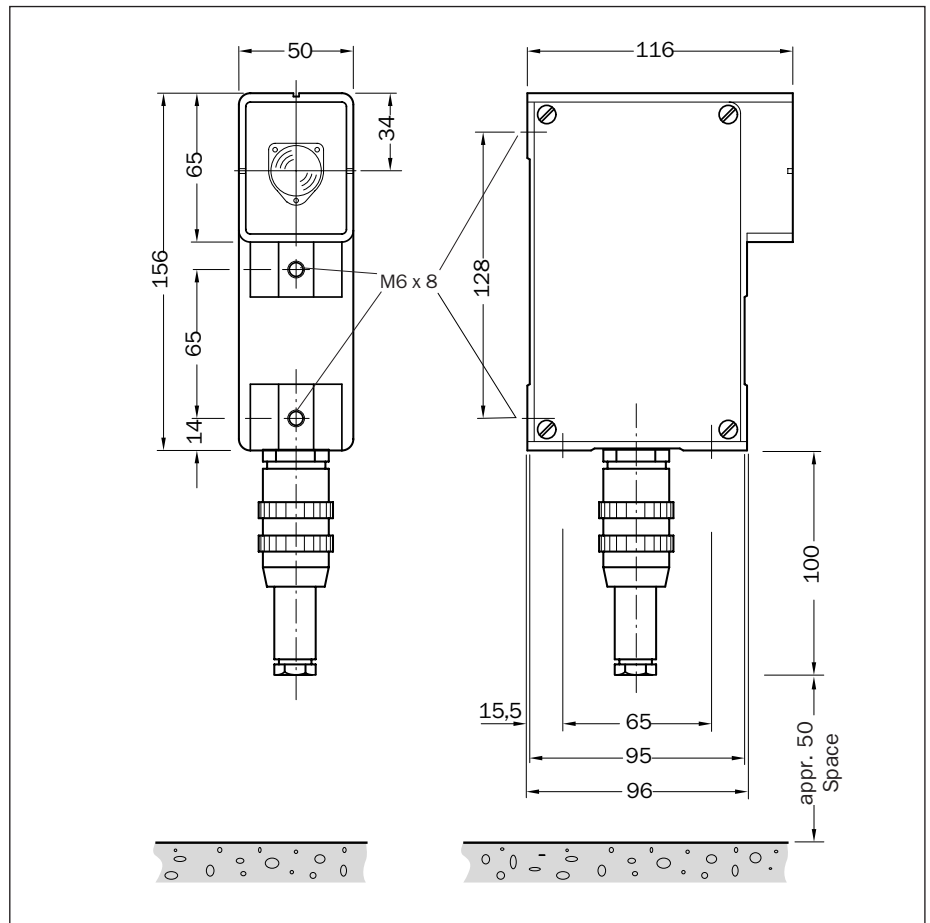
Dimensional Drawing WSU 26/2-xx1 and -xx3 and WEU 26/2-xx1, -xx2 and -xx3
